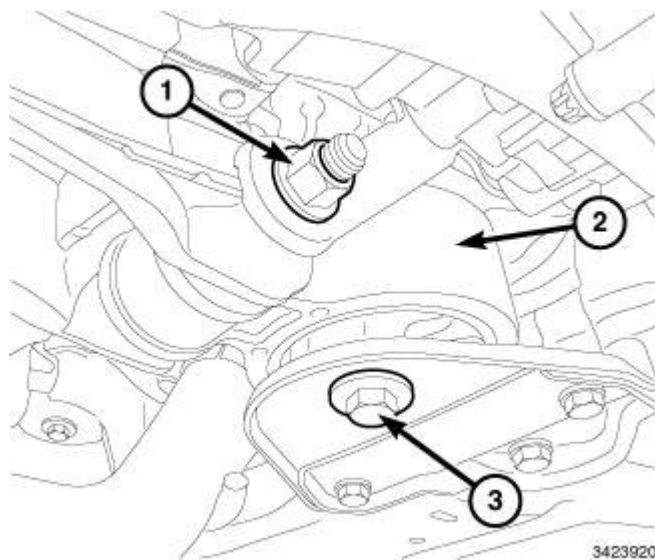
Support Bracket-To-Engine Mount Bracket Nut, Rear Mount & Bolt
